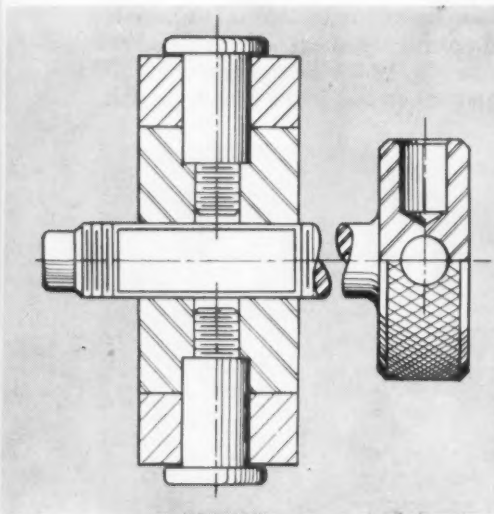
Drawing of heavier pivot assembly in which pivoting member accommodating clamping screw is centered on two studs.
